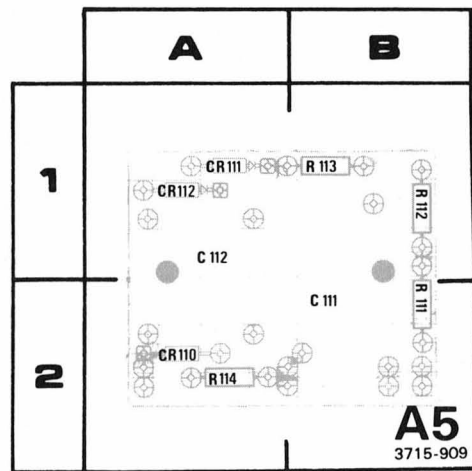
A5-Focus DC Restorer circuit board assembly.
